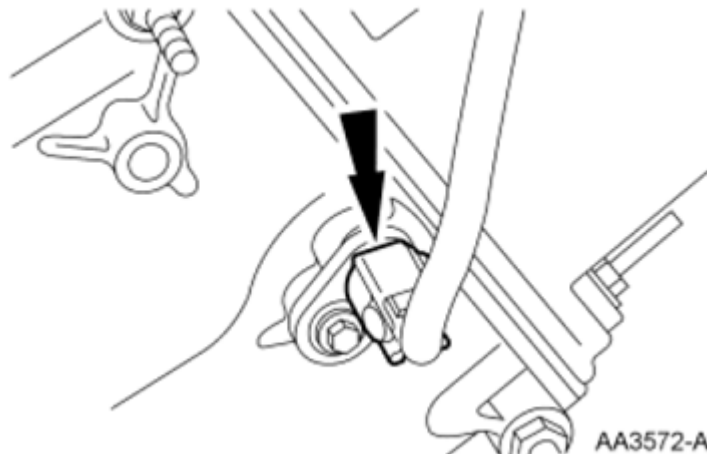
Locating Throttle Control And Throttle Position (TP) Sensor Electrical Connectors
